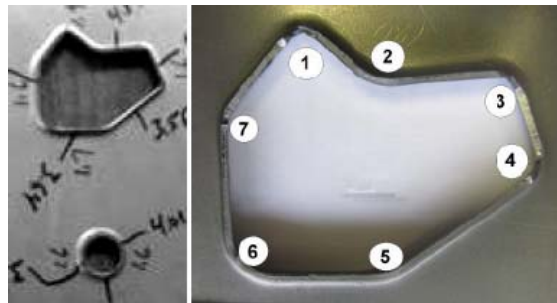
Large scale hole piercing and hole expansion tests. The flanged holes contain three features (round hole, multi-shaped hole, and curved flange).
